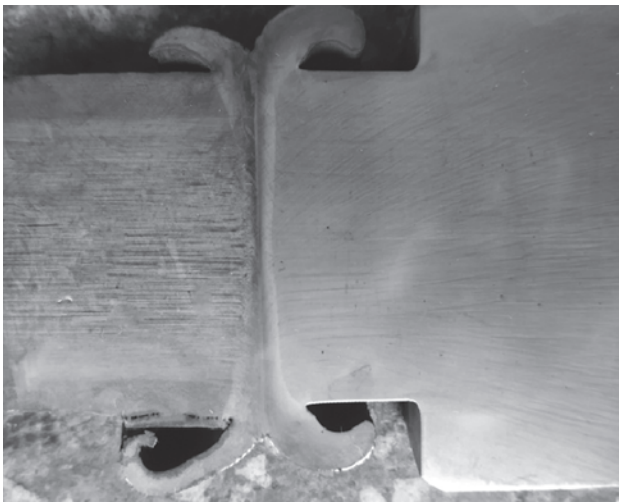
Macrograph of a friction weld. Etching with Adler's reagent according to the withdrawn standard PN-61/H-04502 [4] [photo. M. Ostromęcka]
